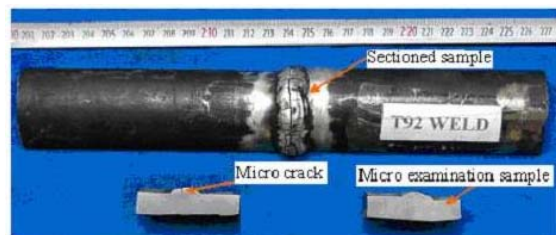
shows the macrograph of the failed weld specimen subjected to liquid penetrant test. The Fig. clearly shows that
